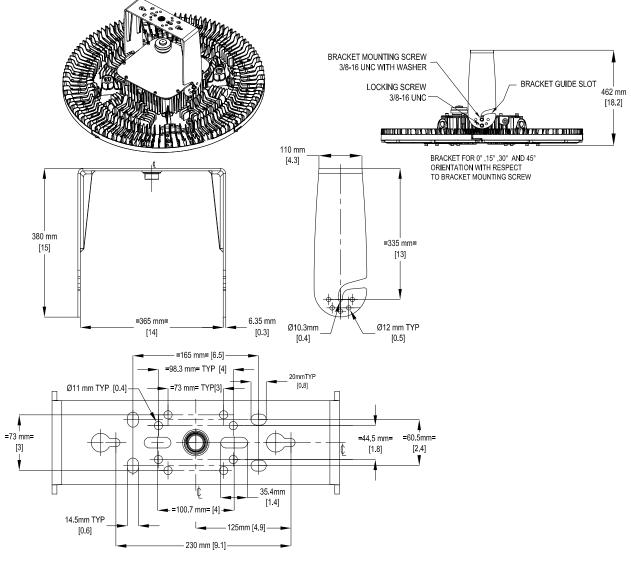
MOUNTING OPTIONS - BRACKET MOUNTING
